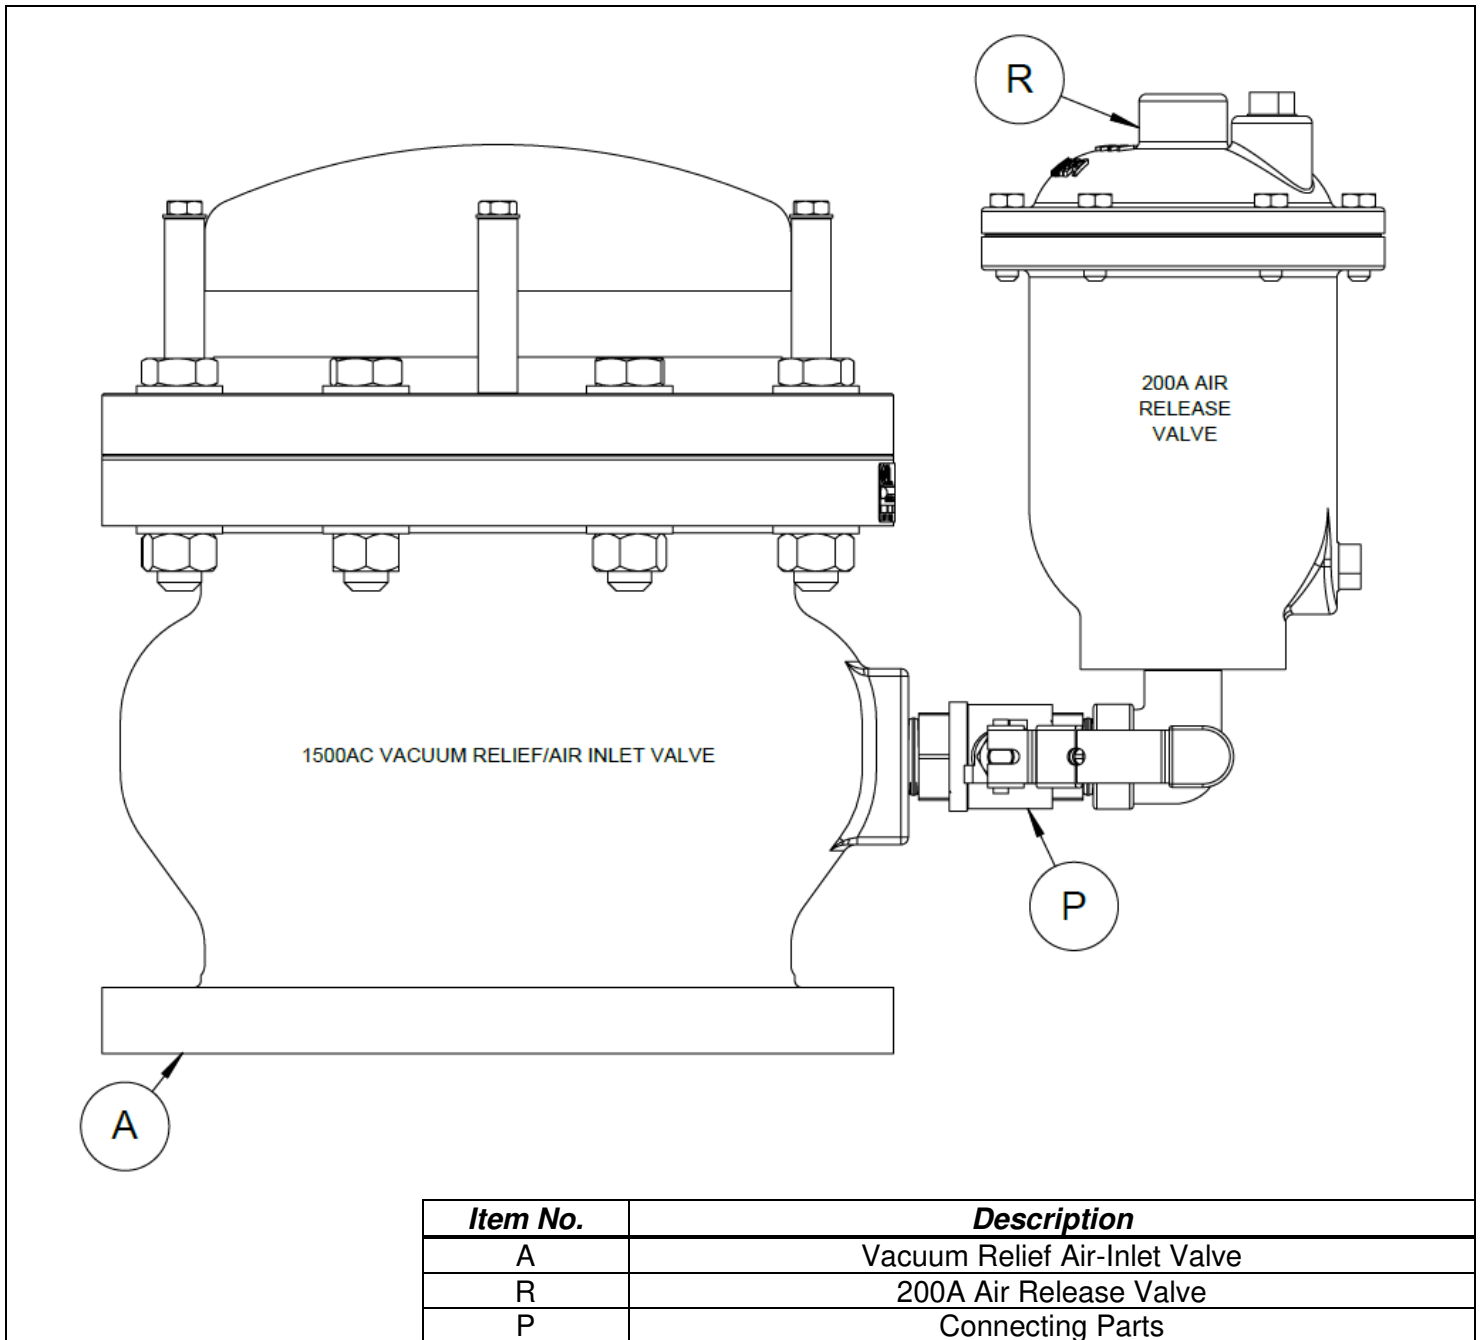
AVR-1500AC equipped with 200A Air Release Valve, Valve Components
